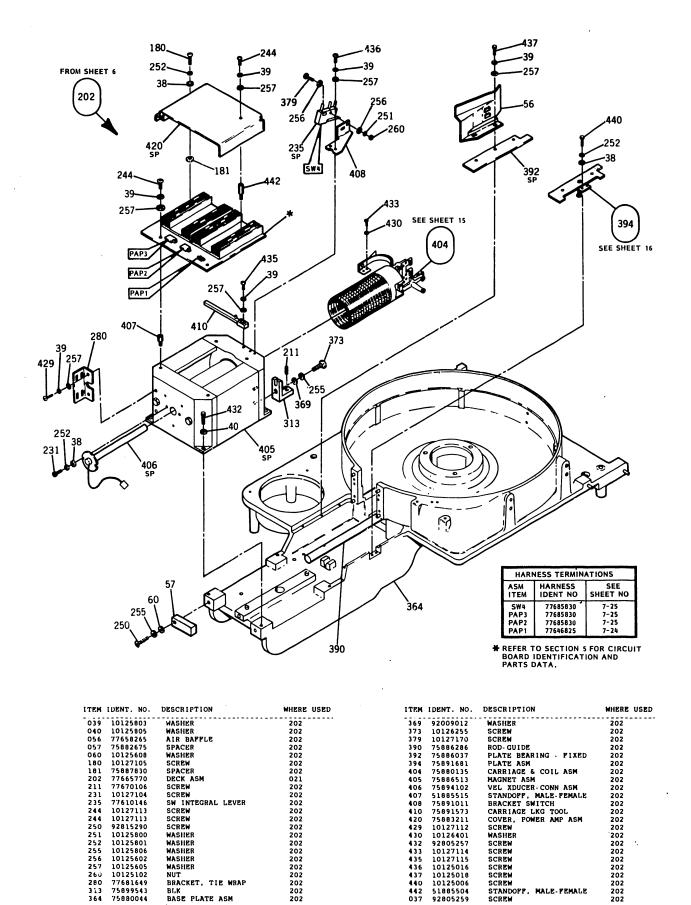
DECK ASSEMBLY (2 OF 3)
